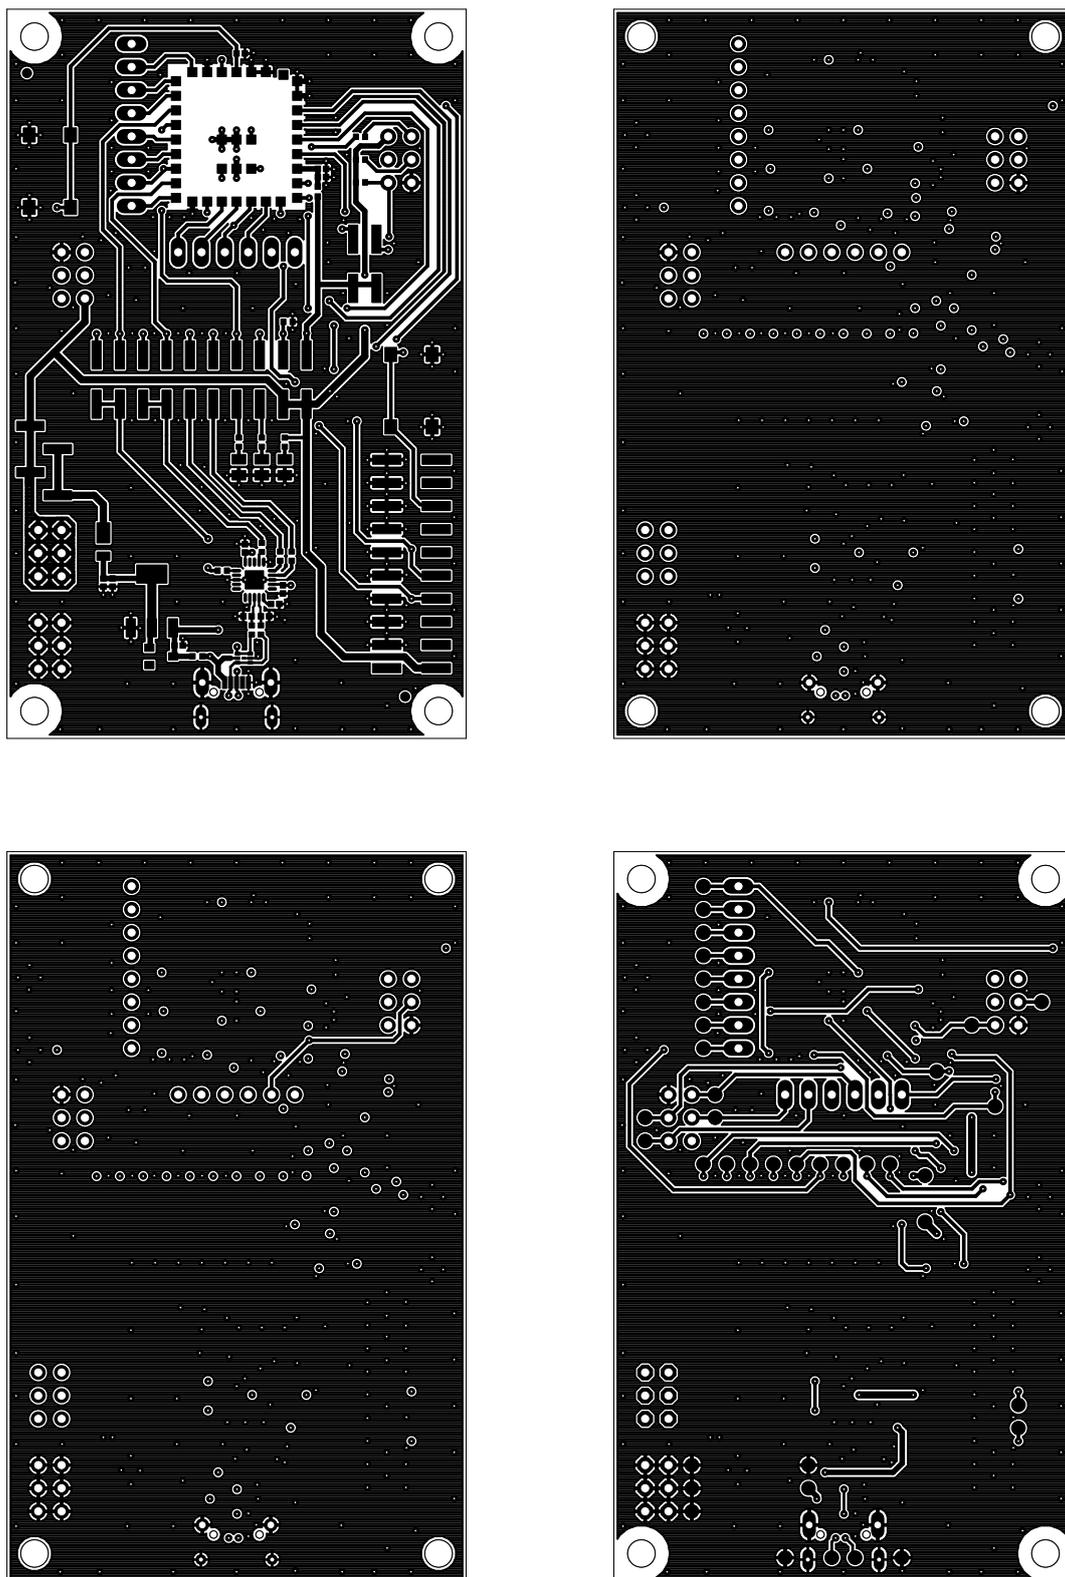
Top layer (upper left), second layer (upper right), third layer (bottom left), fourth layer (bottom right)
